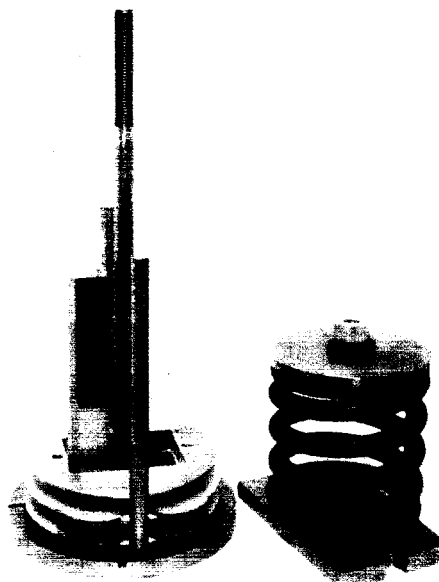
TWO VIEWS OF COLUMN ASSEMBLY JIG
